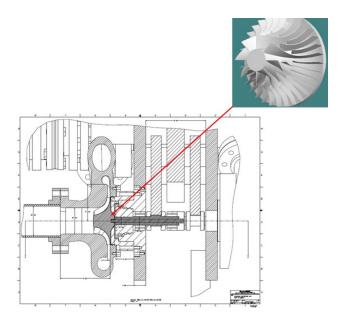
Mechanical Detailed Assembly of One of Six Stages of Pipeline Compressor
